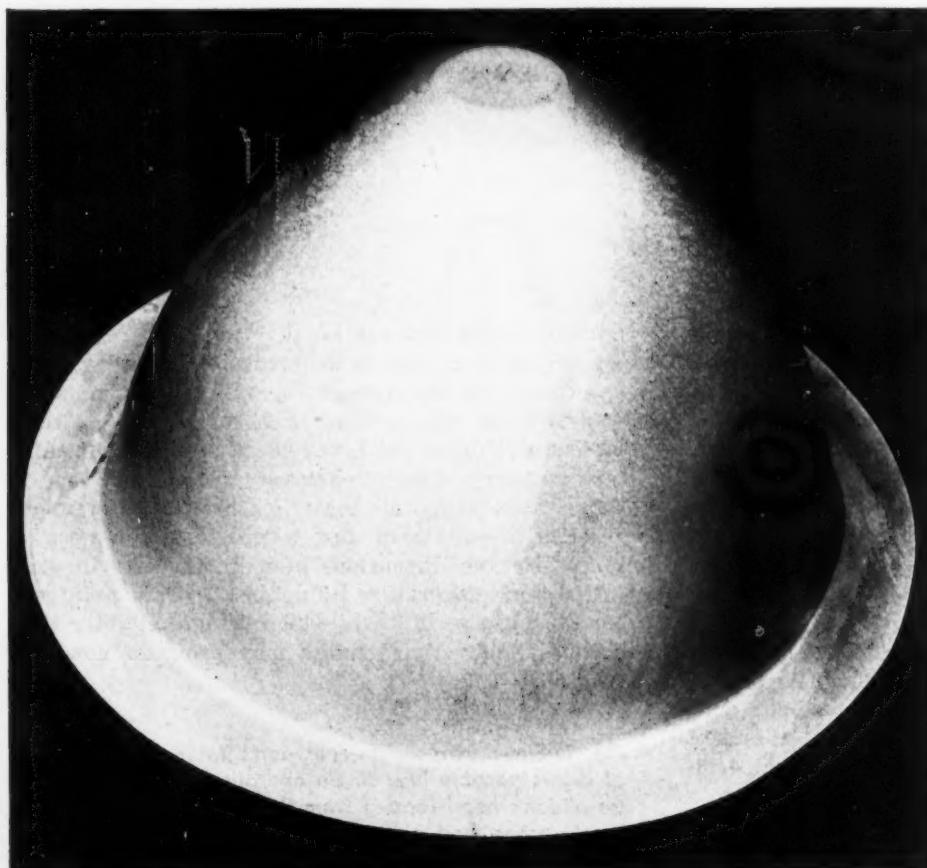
Nose spinner formed by a single draw of hot-magnesium sheet on a heated die
